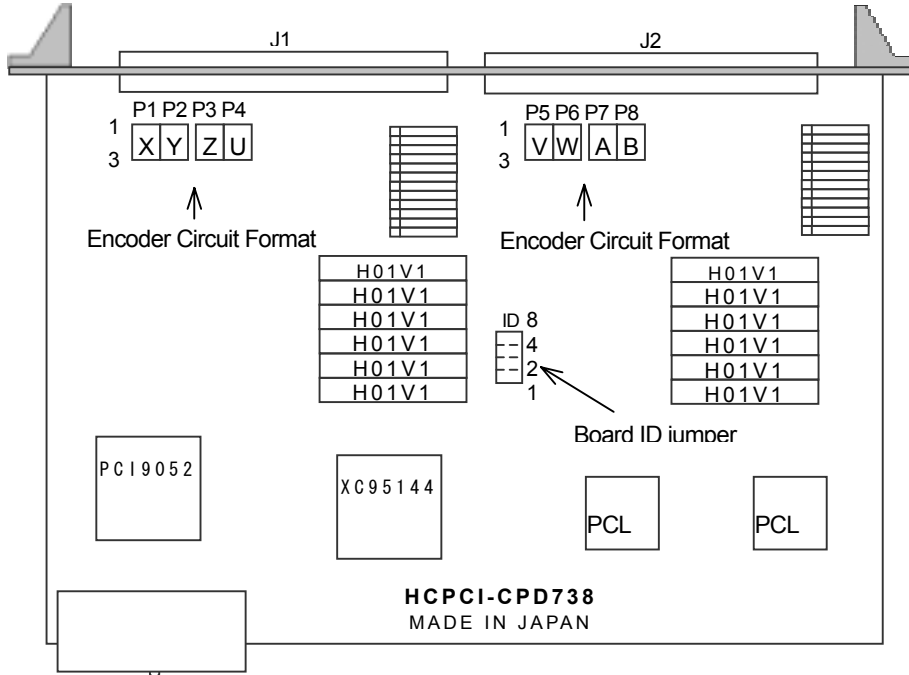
3-3 Jumper Pin Locations on the CPD738 Board
